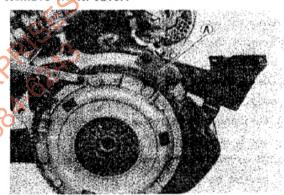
(A) Flywheel stopper Remove distributor assembly.
